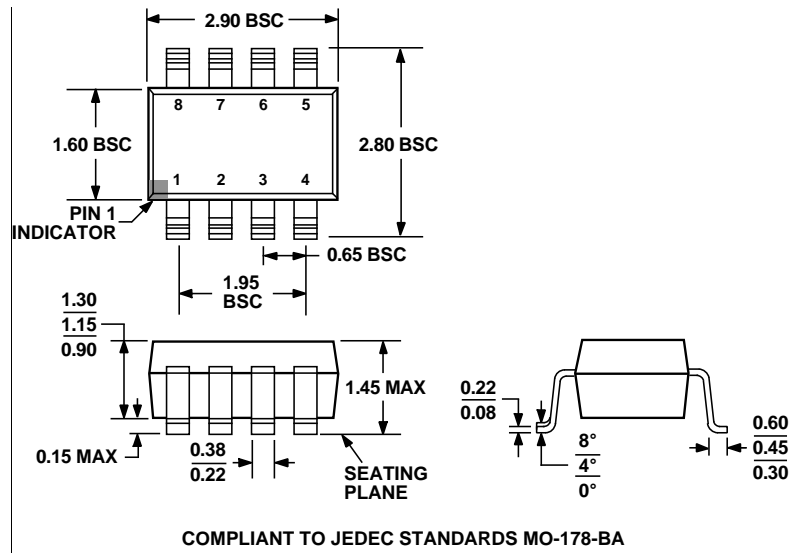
8-Lead SOT-23 Package (RJ-8)—Dimensions shown in millimeters
